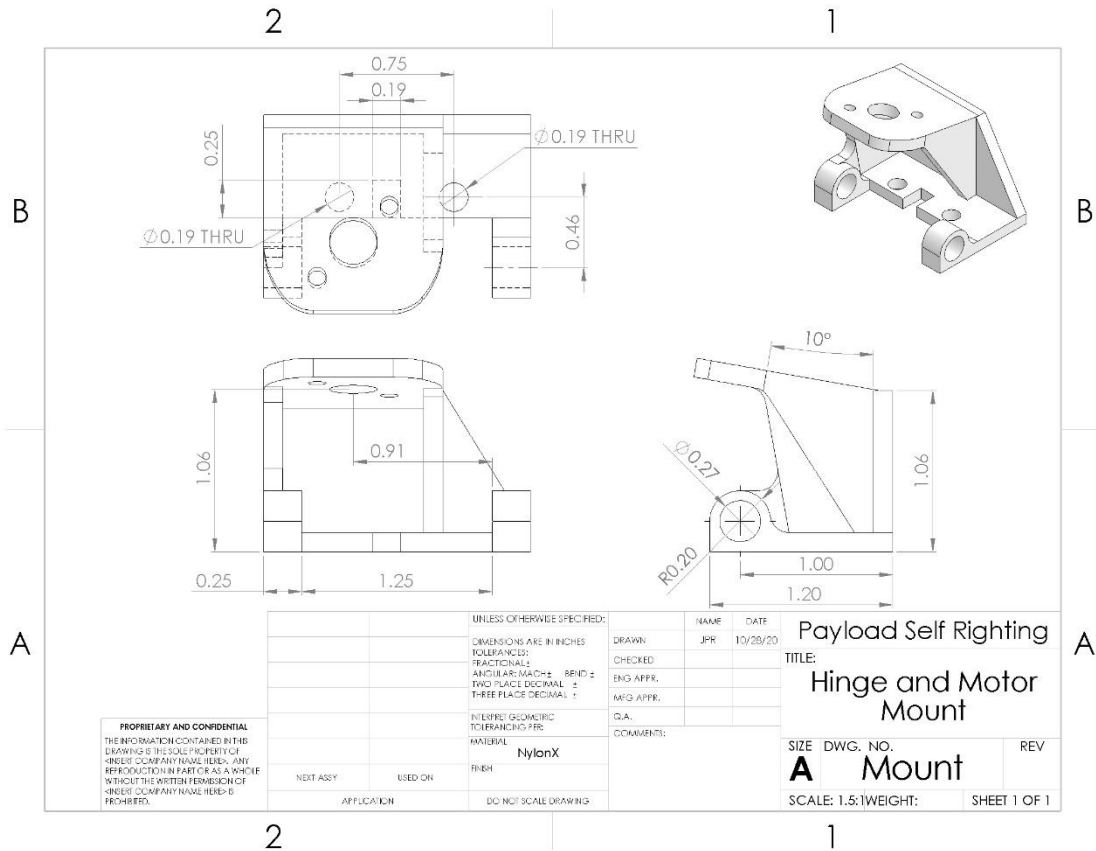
Dimensioned drawing of the integrated hinge and motor mount.
